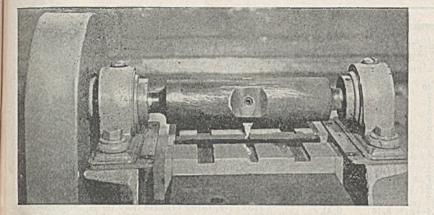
Motor-Driven Notcher Showing Cutting Tool with Guard Removed and Bar in Notching Holder
